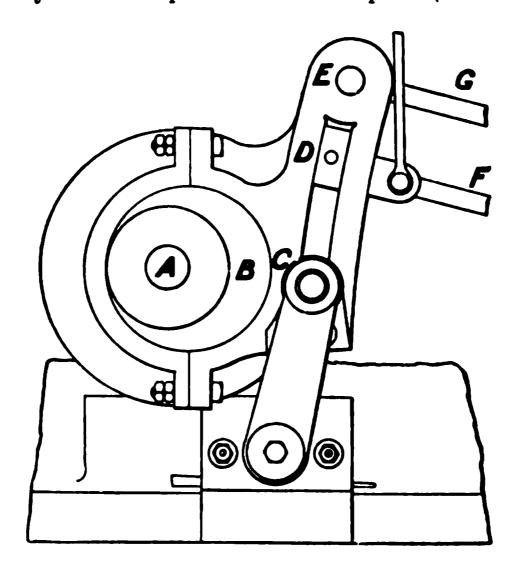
THE FINK SLIDE VALVE GEAR.
